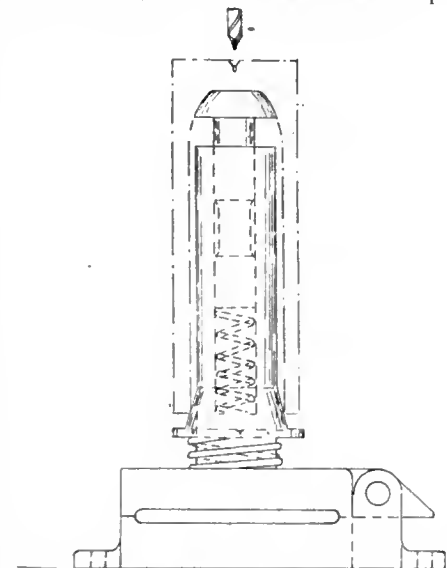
HINGED MANDREL ON HIGH-SPEED DRILL PRESS TABLE FOR CENTERING SHELS.
